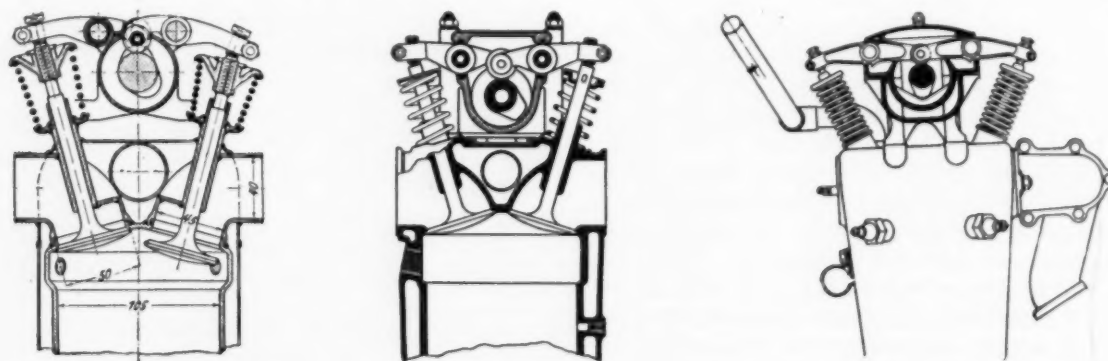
VALVE MECHANISM OF 3 TYPICAL "OVERHEAD CAMSHAFT" ENGINES. LEFT, MERCEDES; CENTER, HALL SCOTT; RIGHT, WISCONSIN
